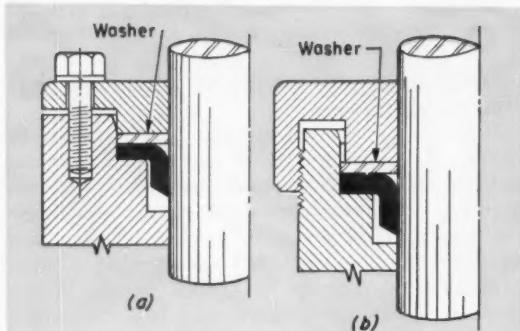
Typical glands for flange packings showing, *a*, bolted and, *b*, threaded nut-type designs with back-up washers.
